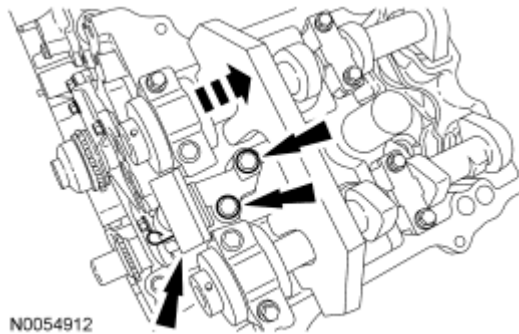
Locating LH Secondary Timing Chain Tensioner Bolts
